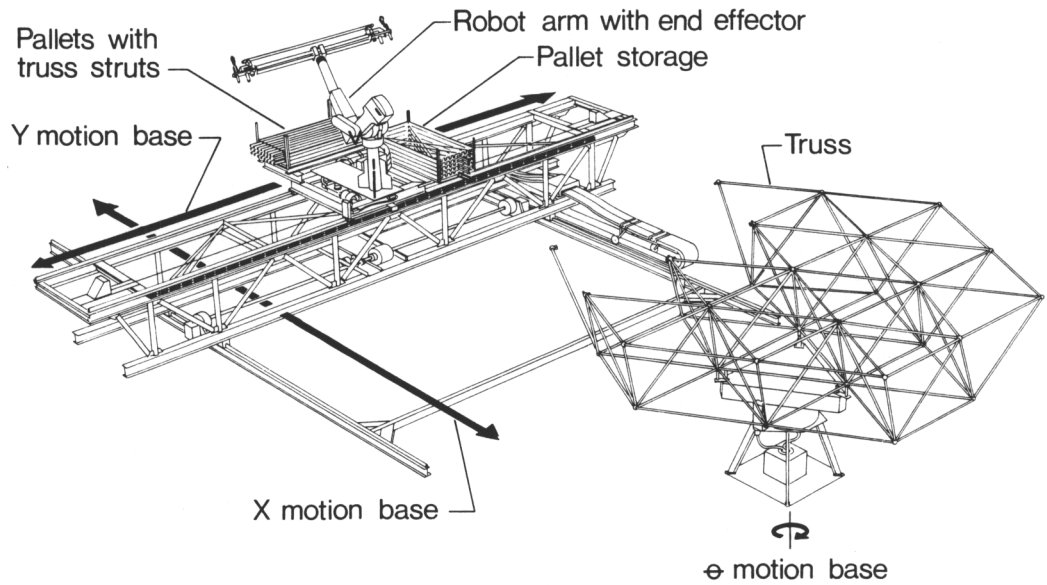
Schematic of Automated Structures Assembly Laboratory
